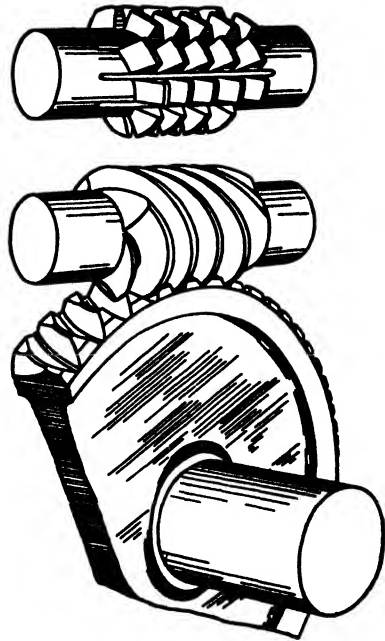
Worm Gear Set and Worm Wheel Tooth Hob.
